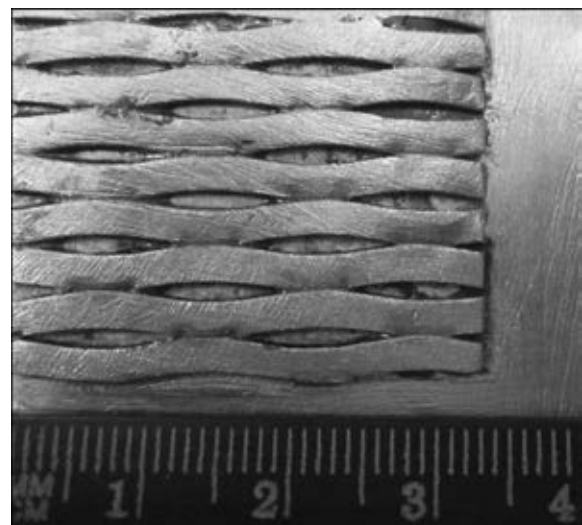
Fragment of whole area joint of mesh-like material to solid sheet material, produced by press braze-welding
